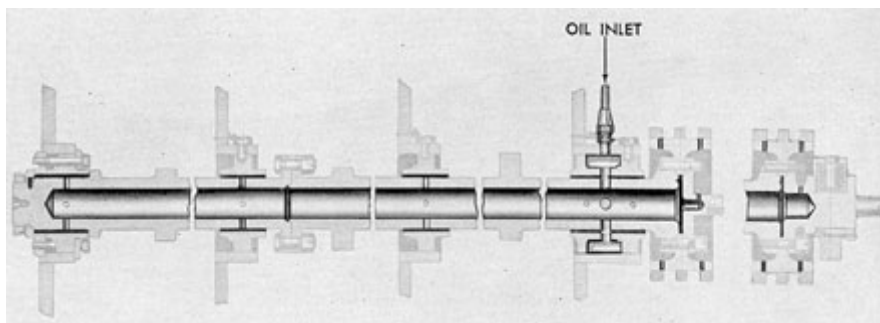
Camshaft and camshaft bearing lubrication, F-M.
